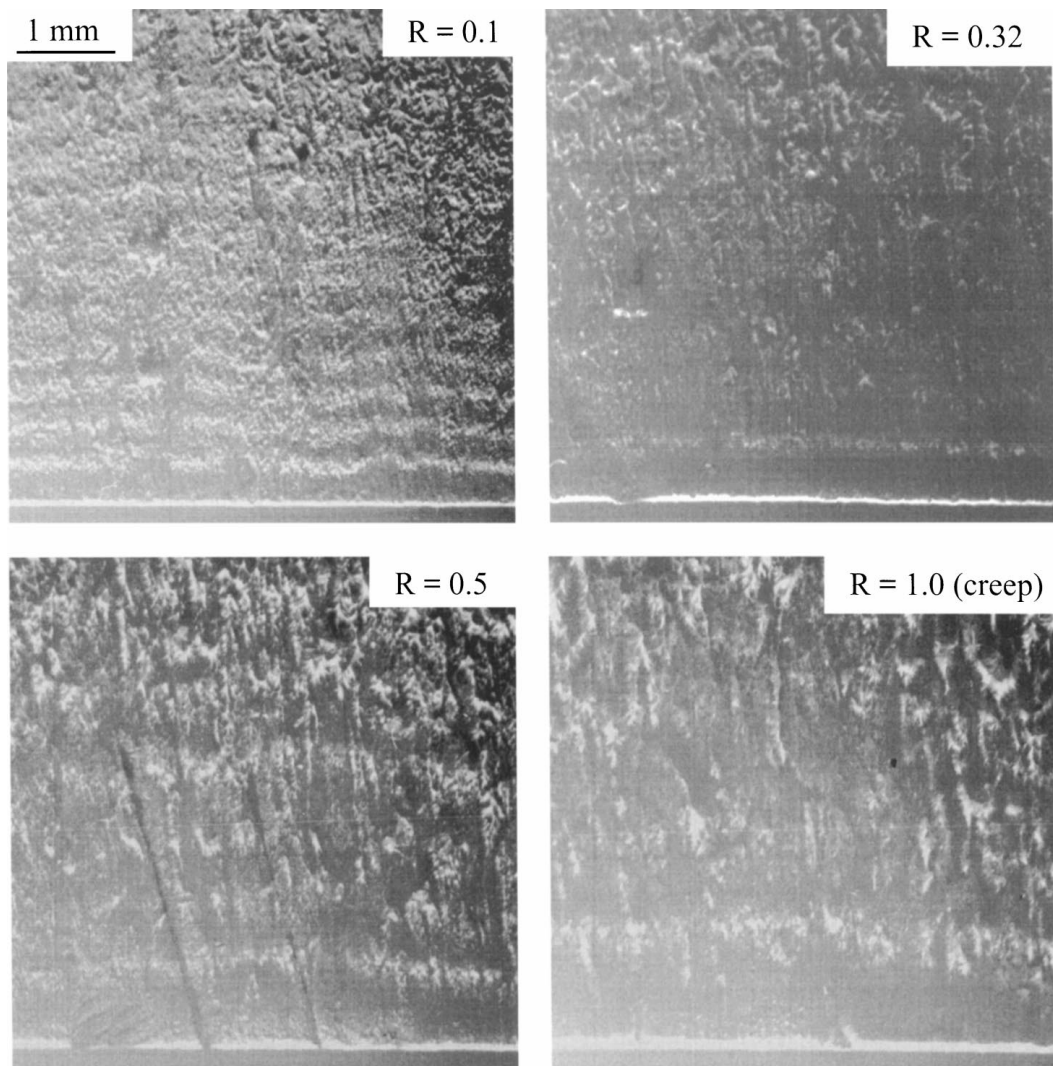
Fracture surfaces of specimens tested under  $K_{I,max} = 1.08 \text{ MPa(m)}^{1/2}$  and  $R = 0.1, 0.32, 0.5$  and  $1.0$ .
